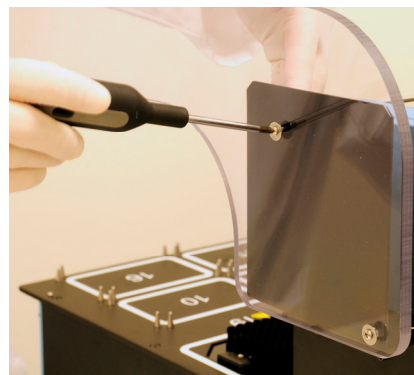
Attach Side Guard to Mount Bracket.
